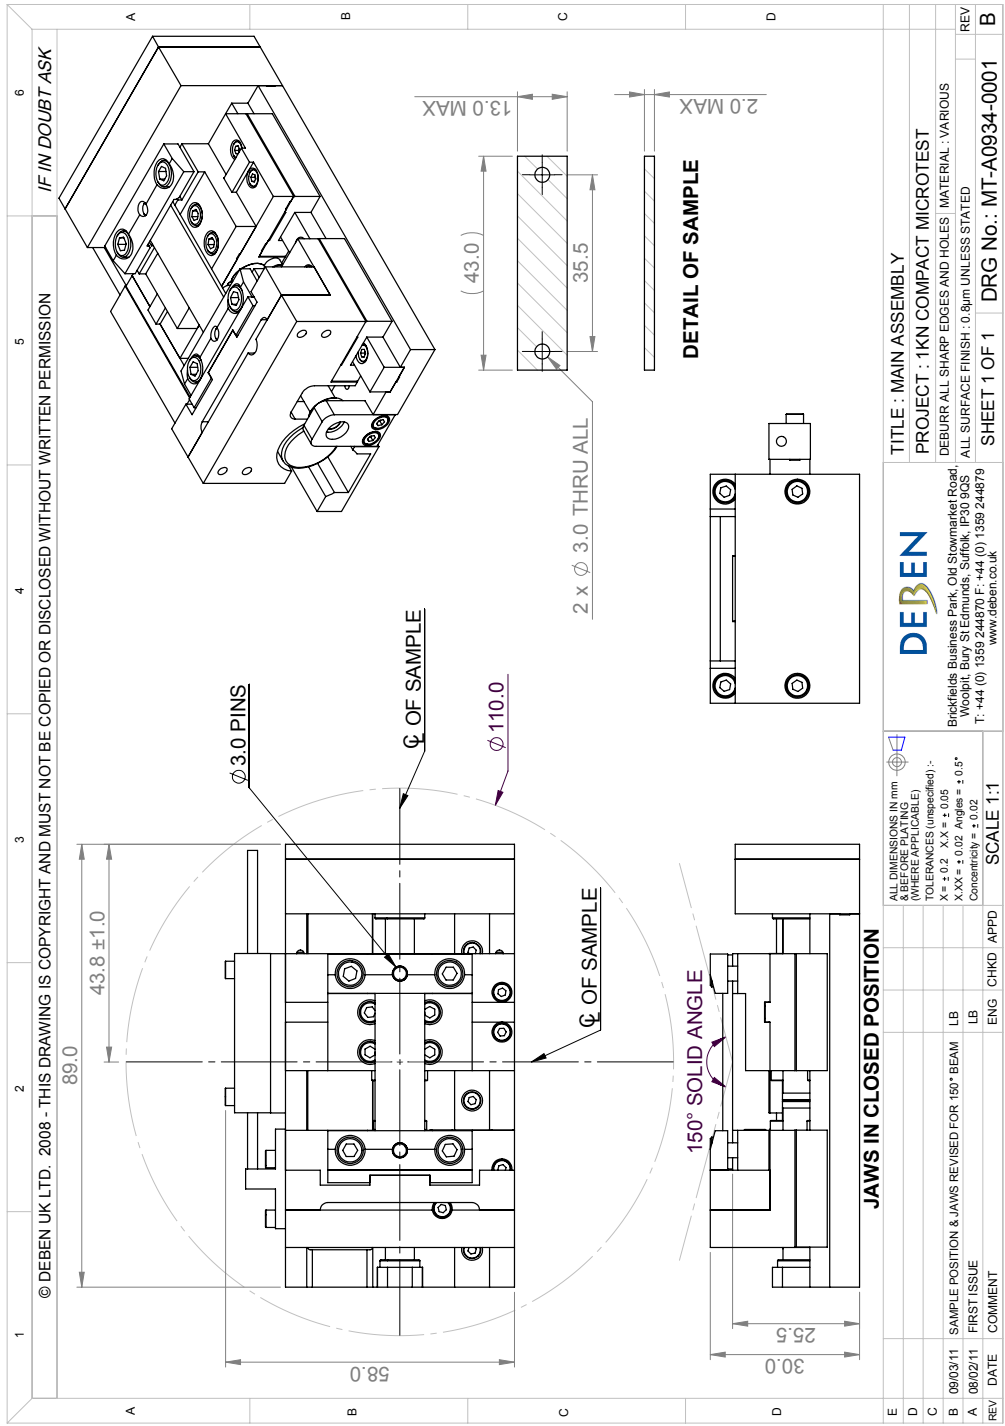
Drawing of the micro-tensile machine operating in X-ray diffractometer.
